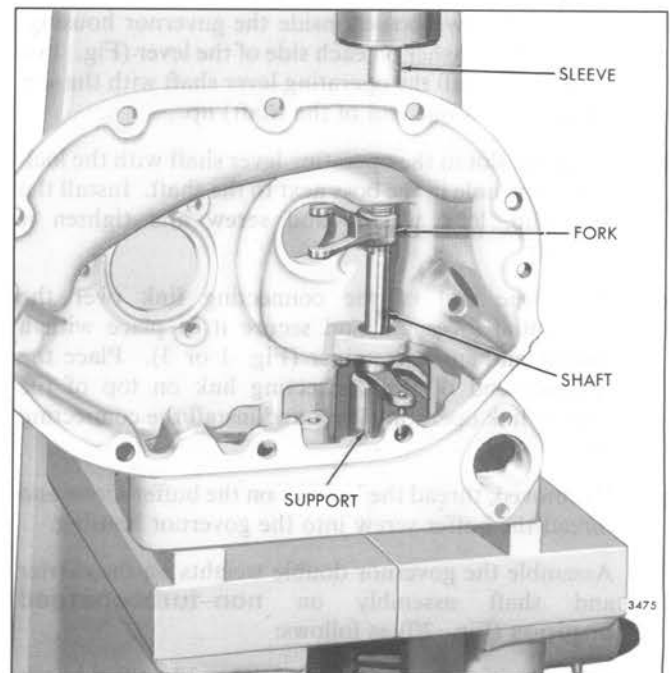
Installing Governor Operating Shaft Fork on Shaft
